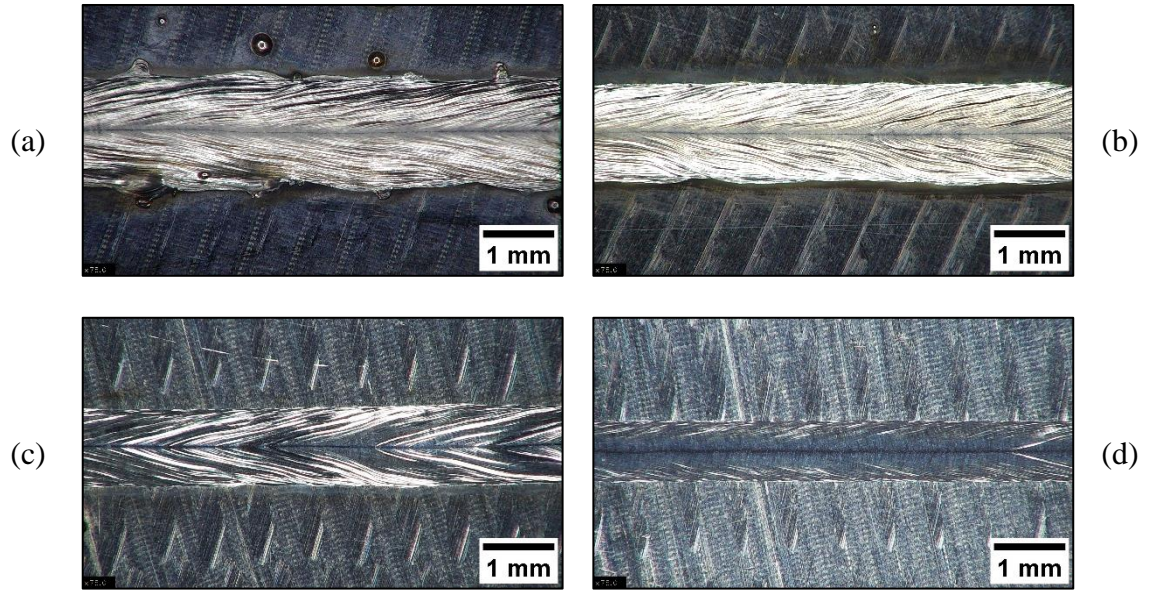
304L laser weld surfaces at 800 W and travel speeds of 5 mm/s (a), 10 mm/s (b), 25 mm/s (c), and 50 mm/s (d).
